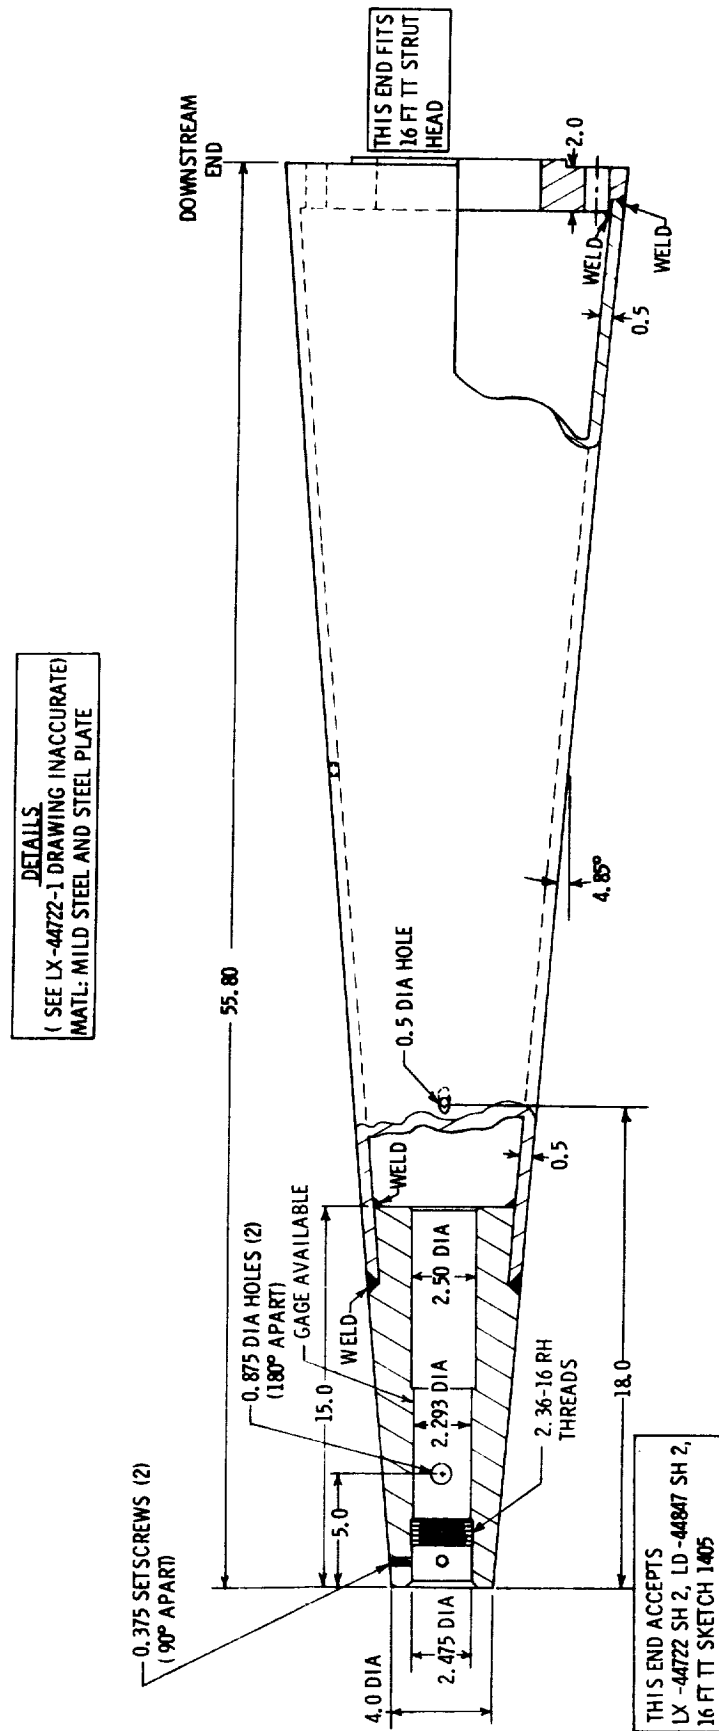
Sketch of long sting cone LX-44722-1. (All dimensions are in inches unless otherwise indicated.)
